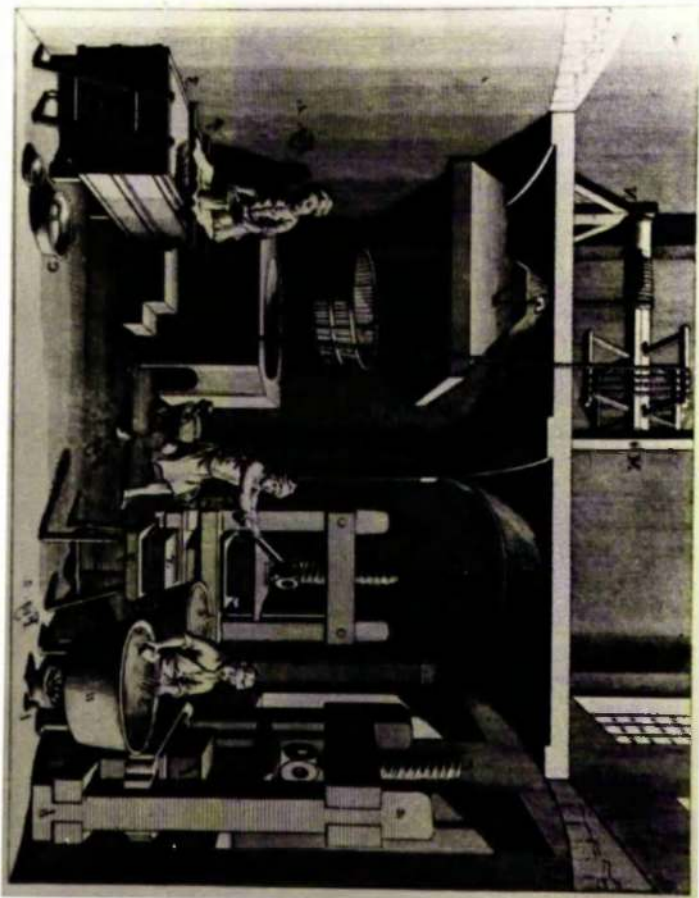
Making a sheet of paper; couching it; and pressing, 16th c., Engraving, French.
